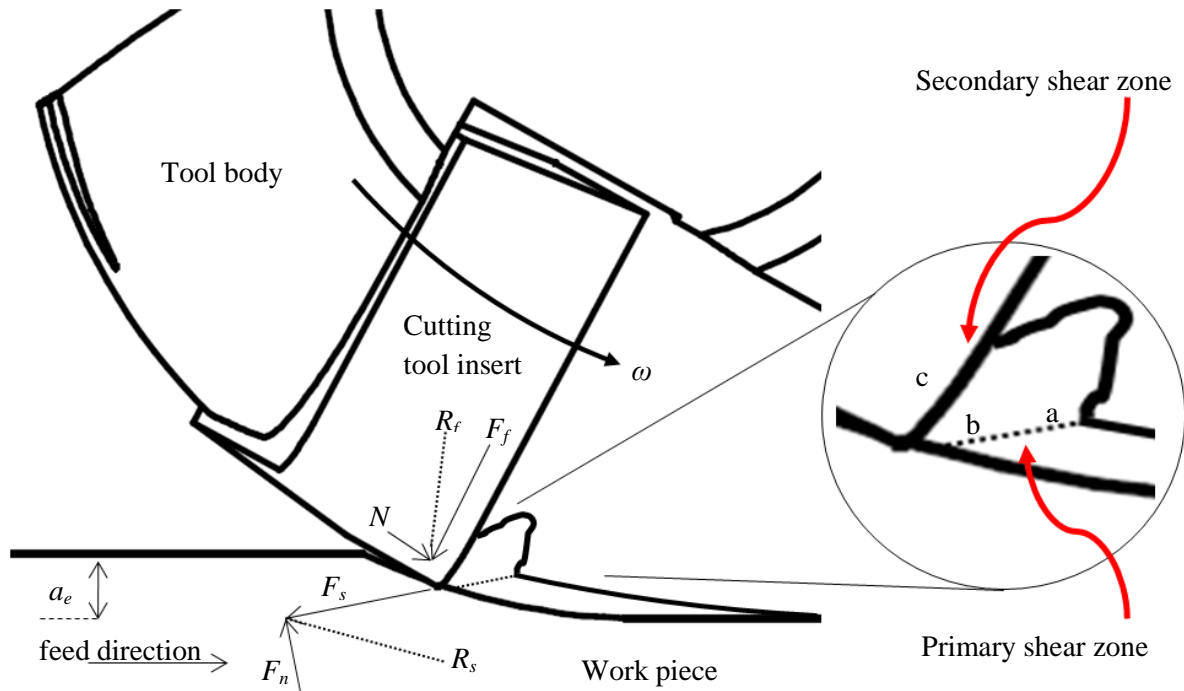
Tool failure constraints due to the mechanical demands on the cutting tool
